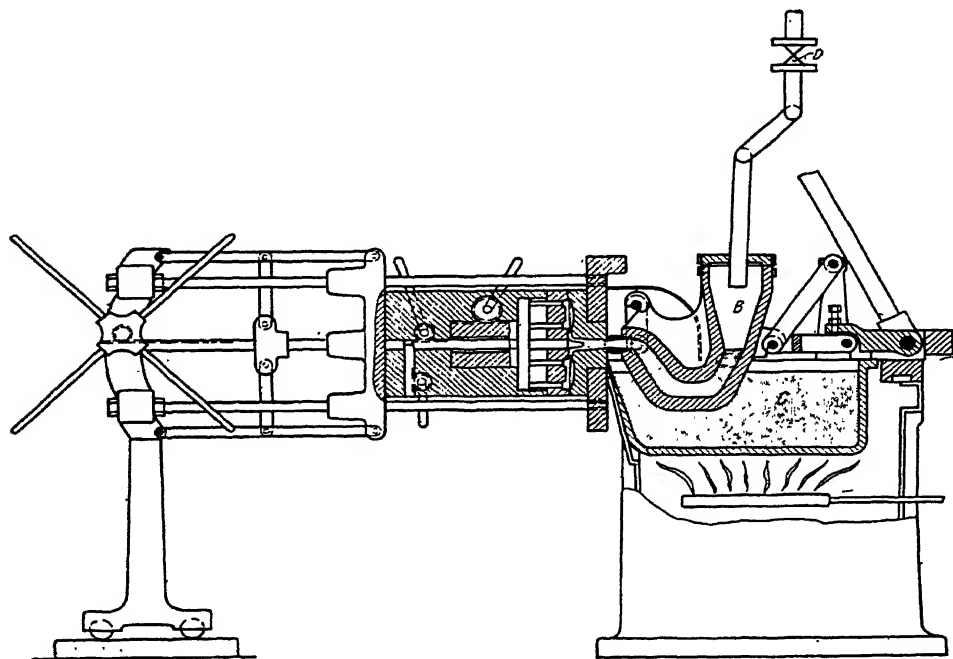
TYPICAL GOOSENECK MACHINE IN CASTING POSITION.
